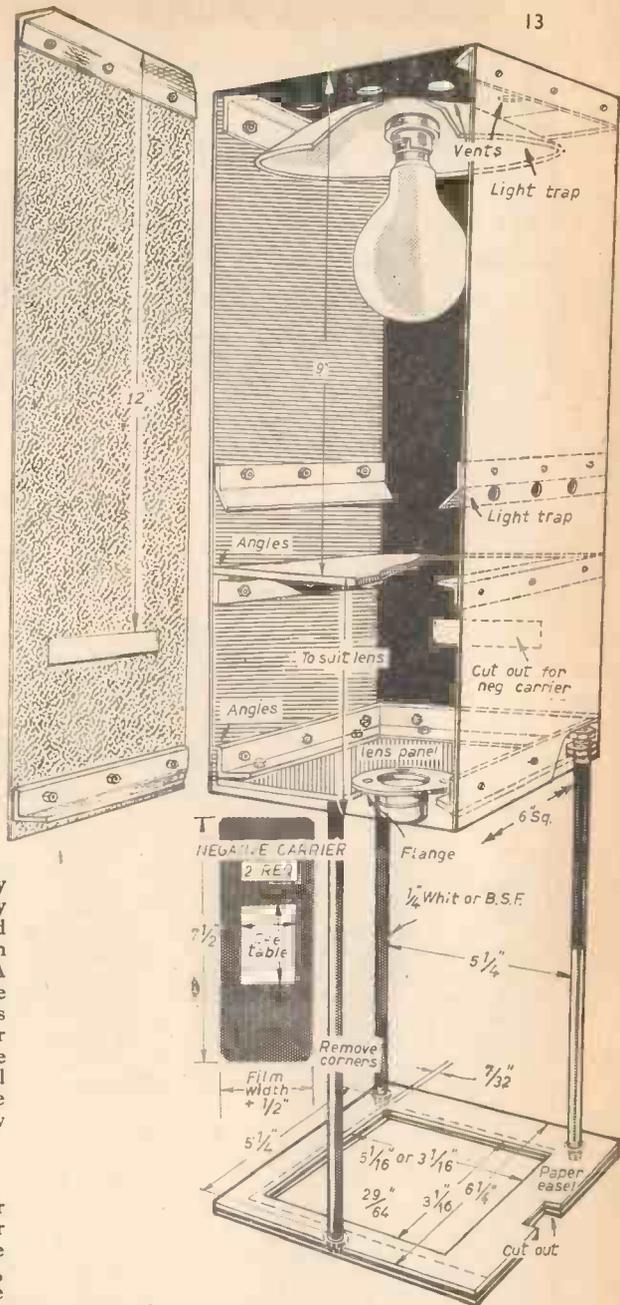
General arrangement and details of the enprinter together with dimensions.
